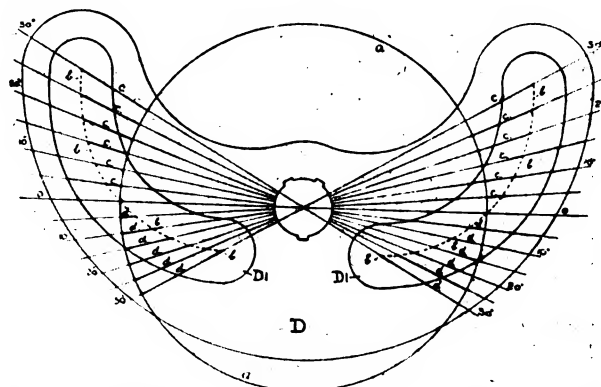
Klee's Tangential Steering Gear.—Detailed drawing of the cam-plate, D, showing how the cam-slots, D¹, are "set off" from the neutral circle.
